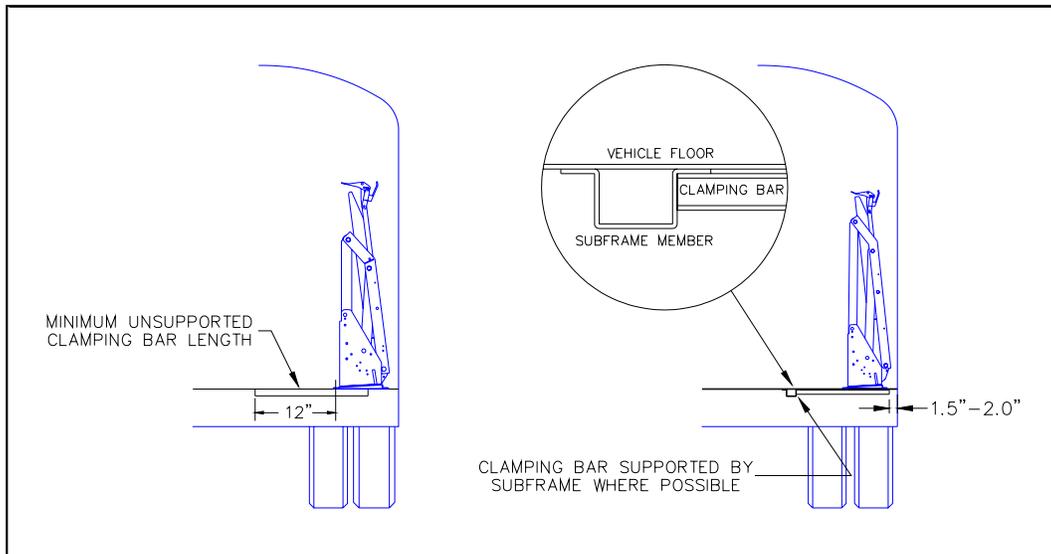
BUS CLAMPING BAR ARRANGEMENT
